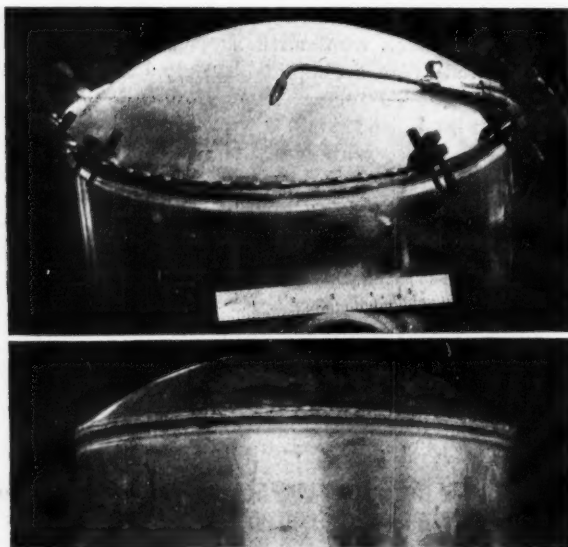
(left)—Welding small dished tank head, start and finish, showing clamps and burner. Fig. 7 (above)—butt type of weld. Note poor fillet on reverse side
